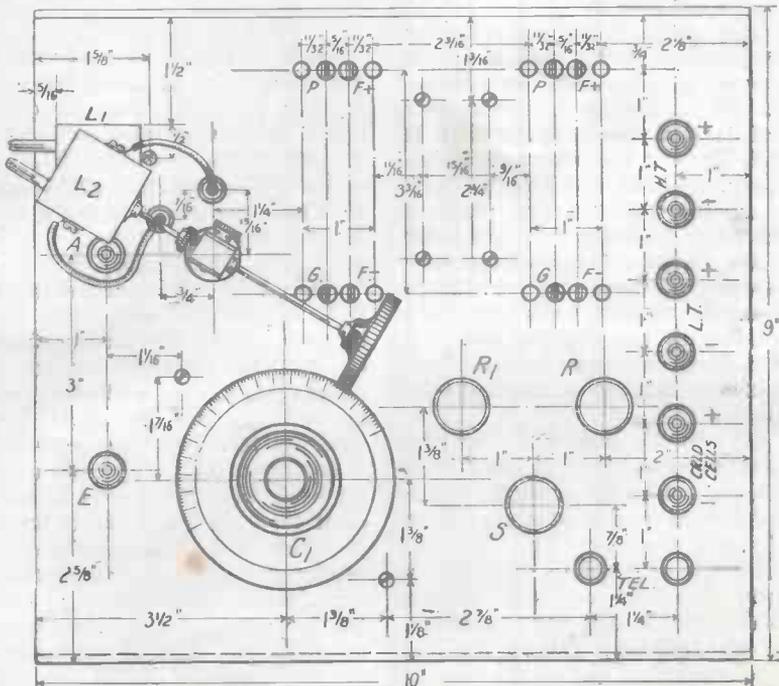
The panel layout and drilling dimensions. Blue print No. 64A.
